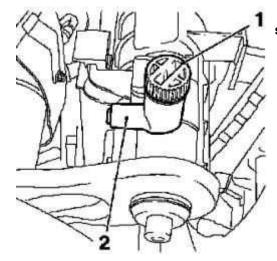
Drain coolant: 1 - Drain screw coolant, 2 - drain fitting
